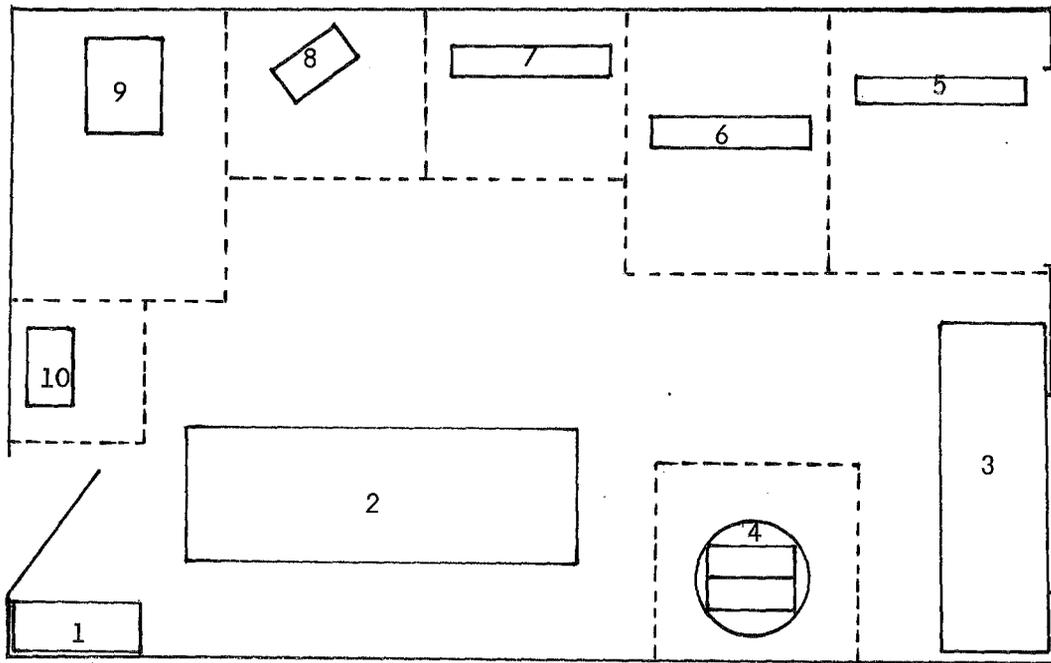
Sheet-iron workshop : 1 - work-clothes cabinet; 2 - working bench, wide; 3 - work-bench; 4 -fly press; 5 - bending machine; 6 - guillotine shears; 7 - cylinder rolling machine; 8 - flangeing machine; 9 - pillar-drill; 10 - tool grinder
